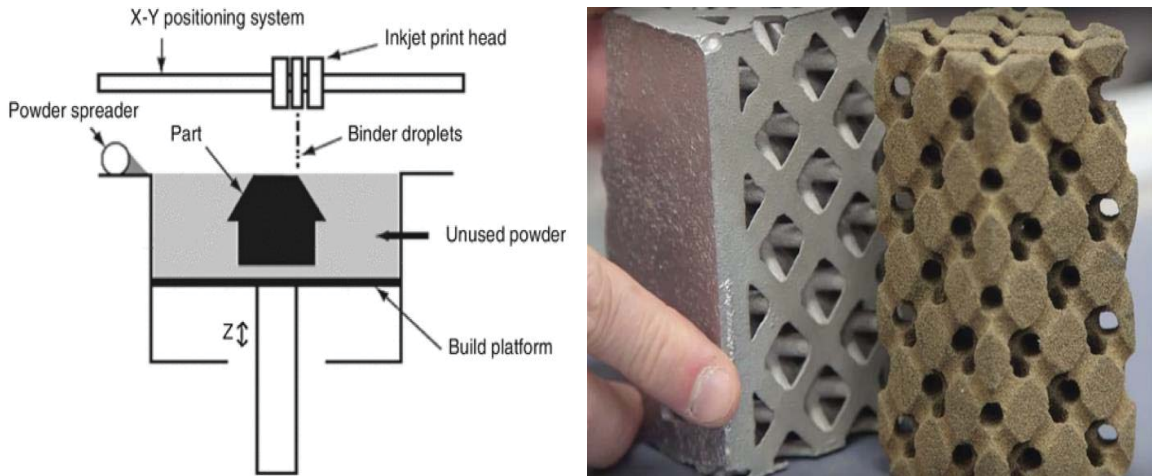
Binder jetting process (left) and a produced sand mold from a binder jetting process along with the casted part (right) [21].
